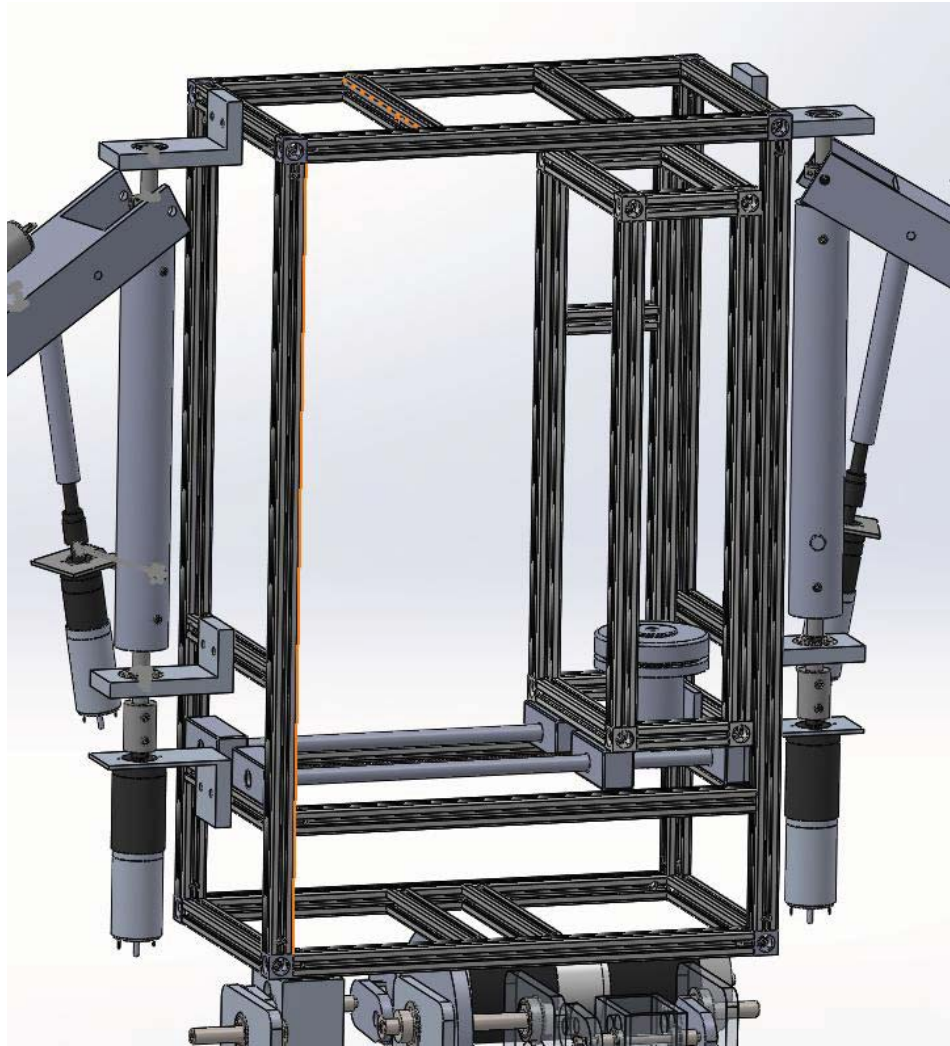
Torso CAD, shown with arm/leg mounting points, rack is hidden behind track rod
